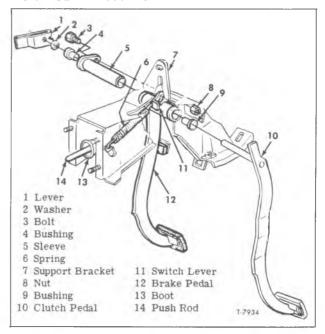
Clutch and Brake Pedal Installation (Conv. Models)
